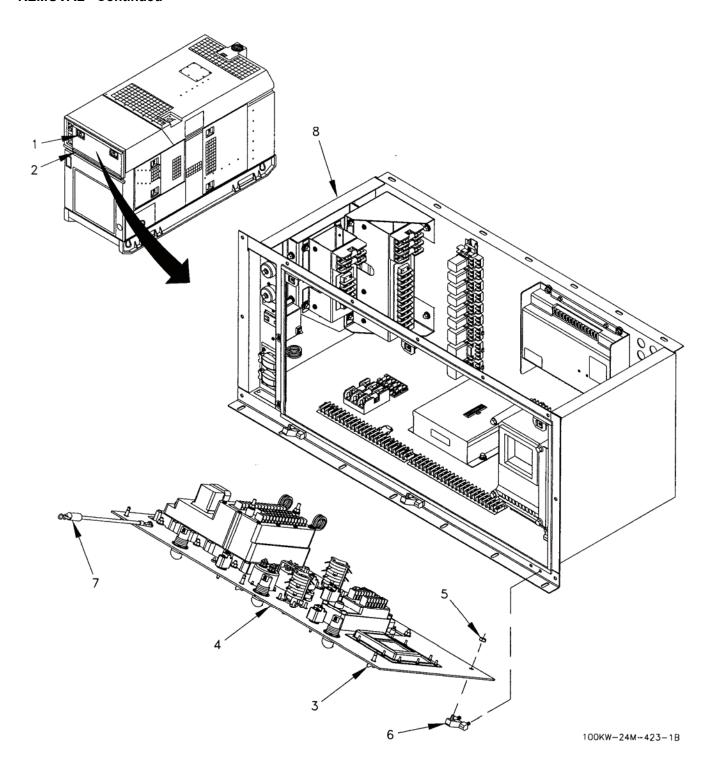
Control Box Panel Assembly (Sheet 1 of 4).
